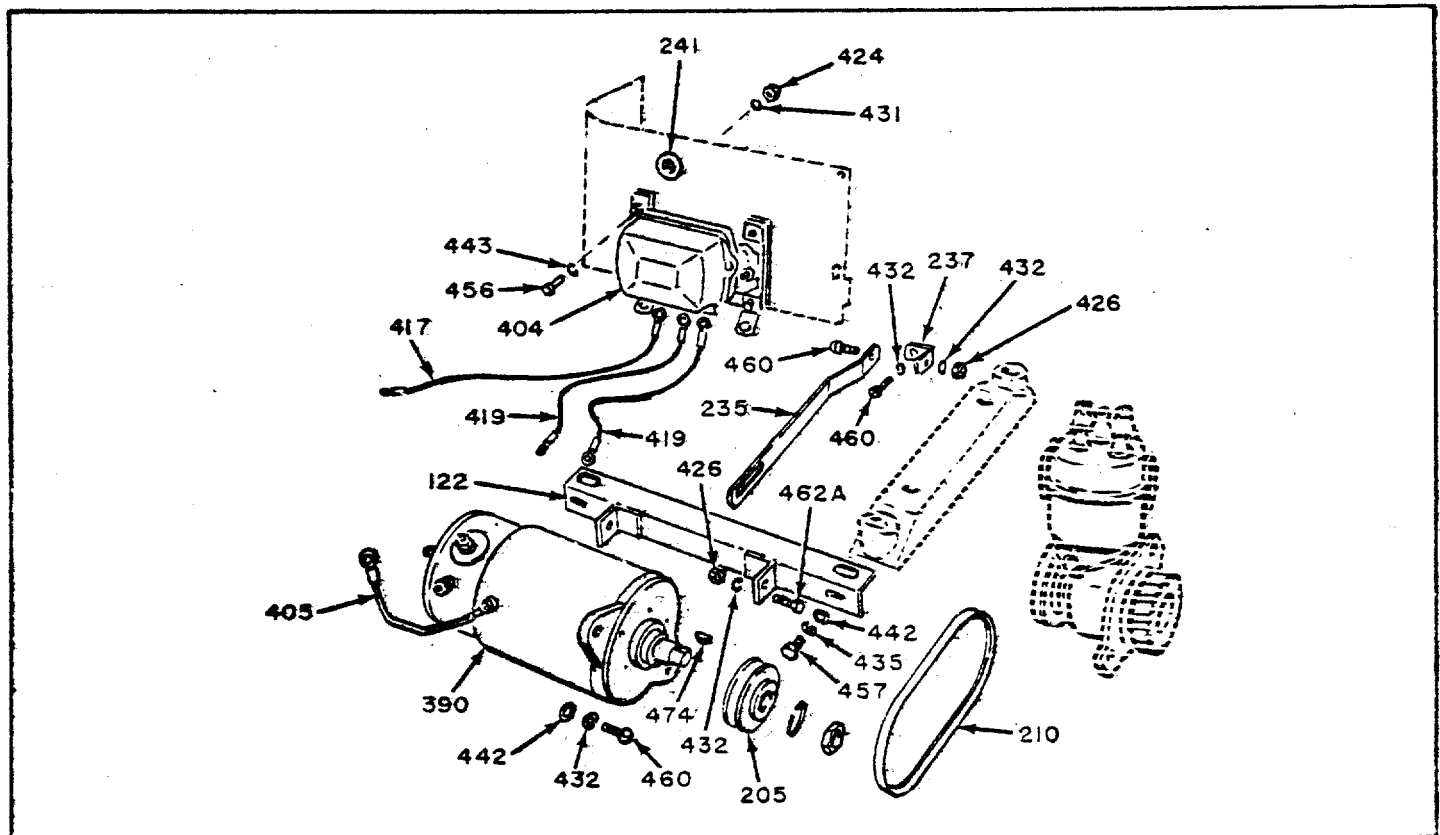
GENERATOR AND REGULATOR MOUNTING GROUP
